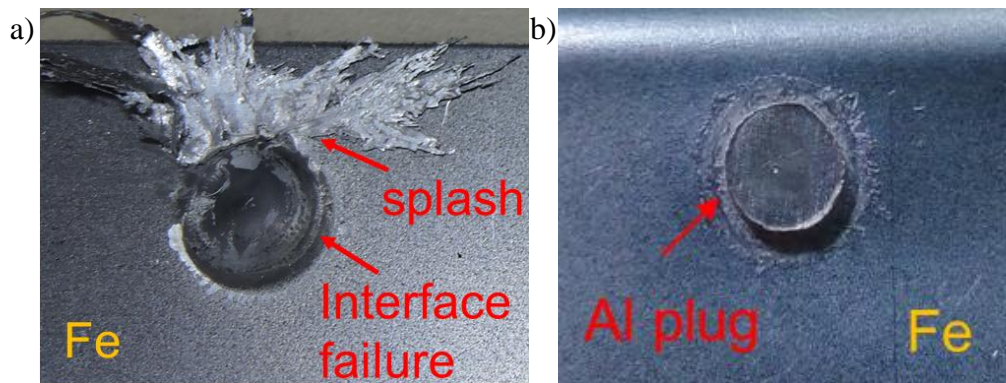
Examples of interface failure (a) and weld plug failure
